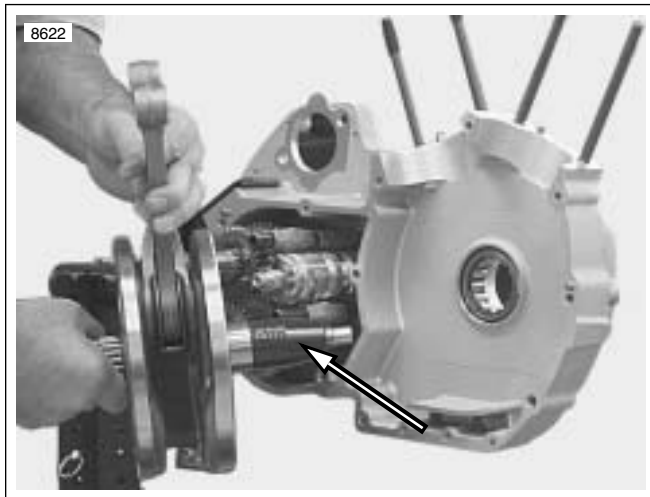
Installing Flywheel Assembly Using Crankshaft Guide Tool (Part No. HD-42326)
